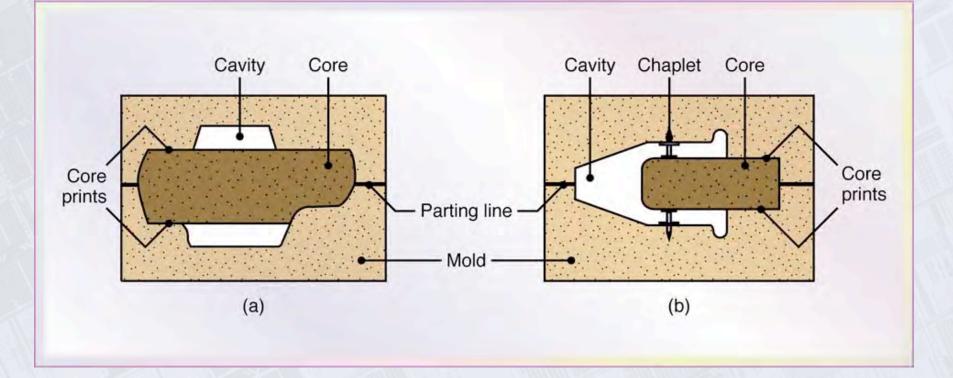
Examples of sand cores showing core prints and chaplets to support cores.
